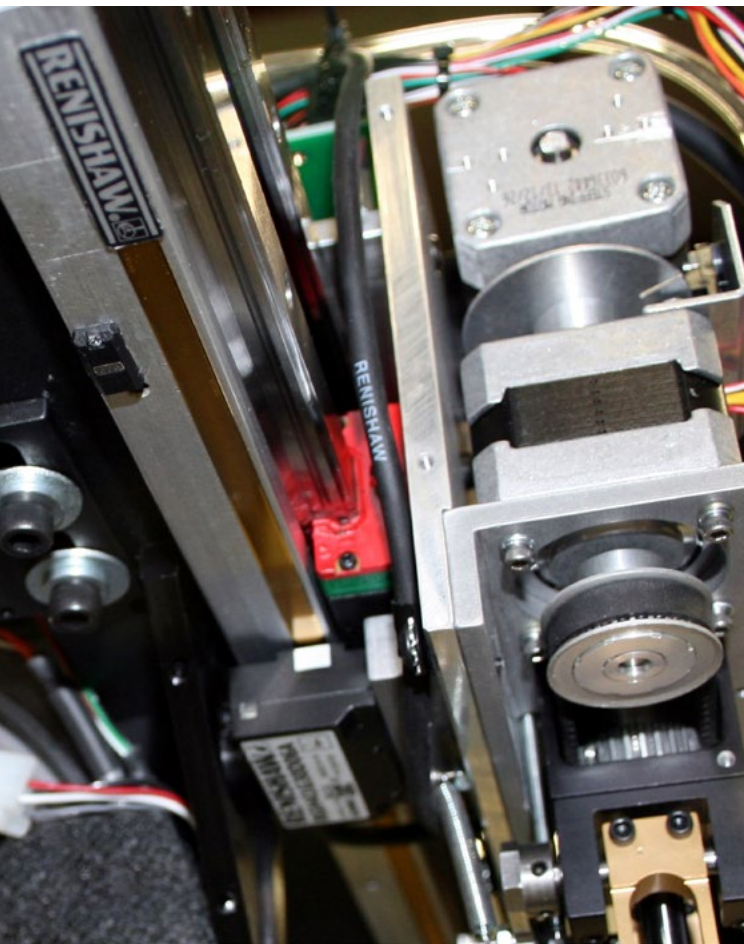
Underside view of a Renishaw linear scale and encoder, one of the most accurate brands for mechanical positioning.
